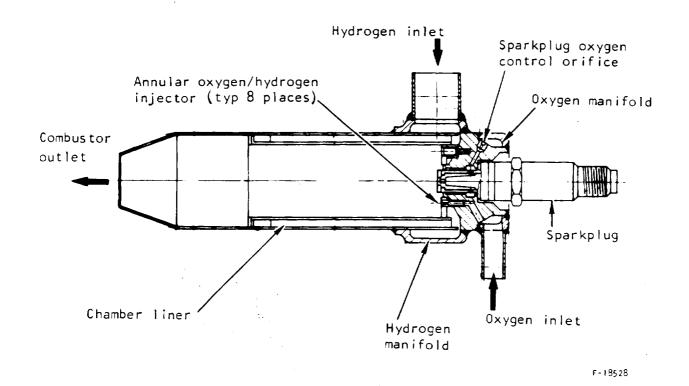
Sectional View of the APU-T Hydrogen-Oxygen Combustor.
